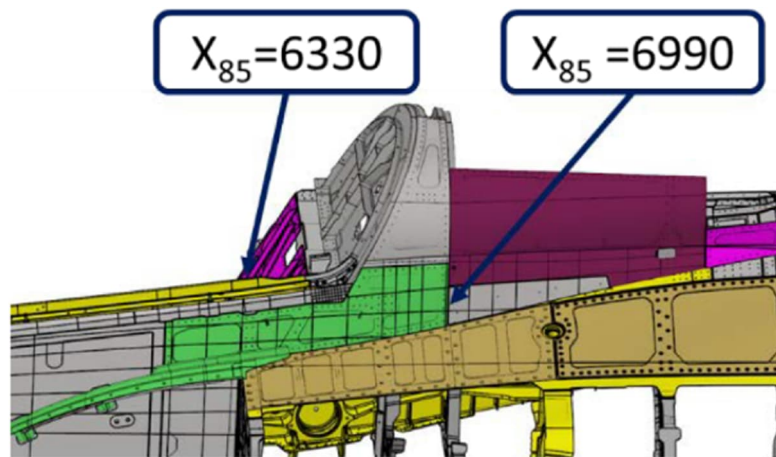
Outboard overview of the Gripen F airframe structure in the canopy sill-to-stringer joint area.
